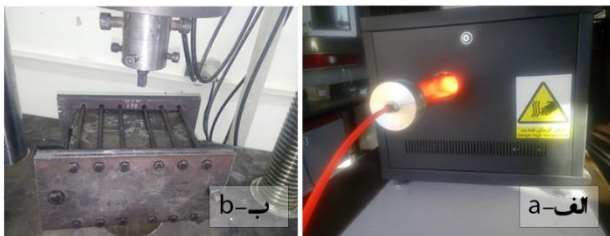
a) Tube furnace device for annealing b) Simple shear extrusion mold
